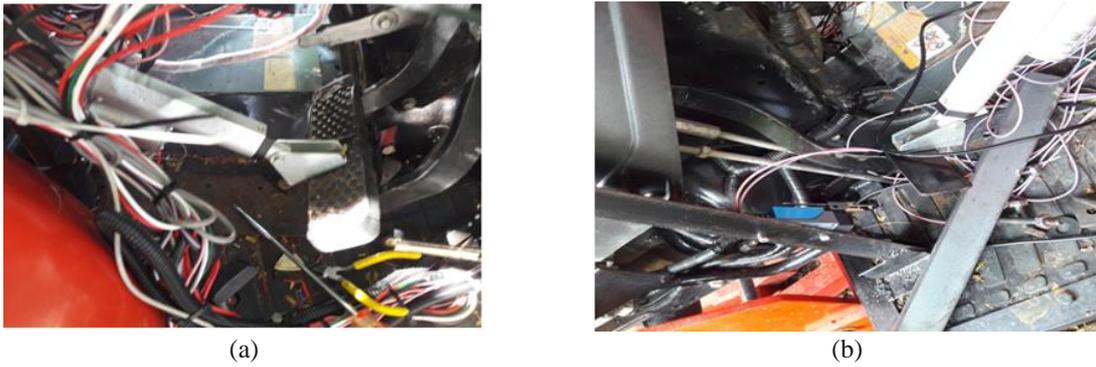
Installing of DC linear actuator on (a) brake and (b) clutch pedal
